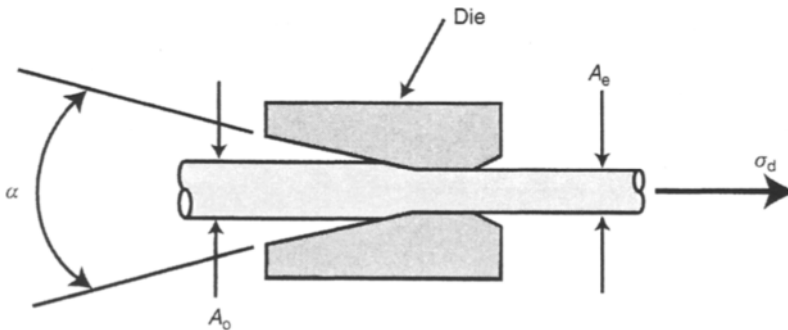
Basic mechanism of drawing, showing the approach angle, α .
